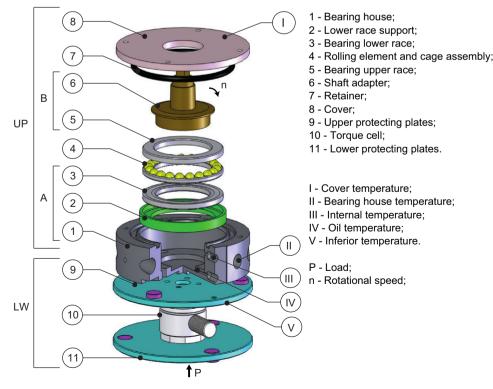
Rolling bearing assembly. Note: Numbers from 1 to 13 are related to the assembly components. Numbers from 1 to V are referred to the thermocouple locations.
